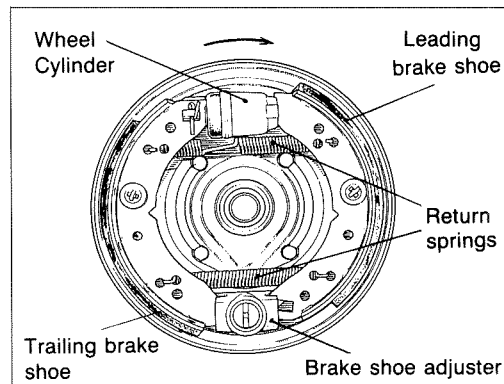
Components of the drum brake which is used to push the shoes apart to accommodate shoe wear.
